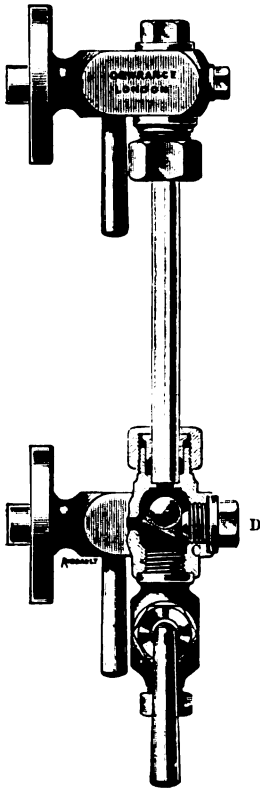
Water Gauge showing Self-closing Ball Valve.
